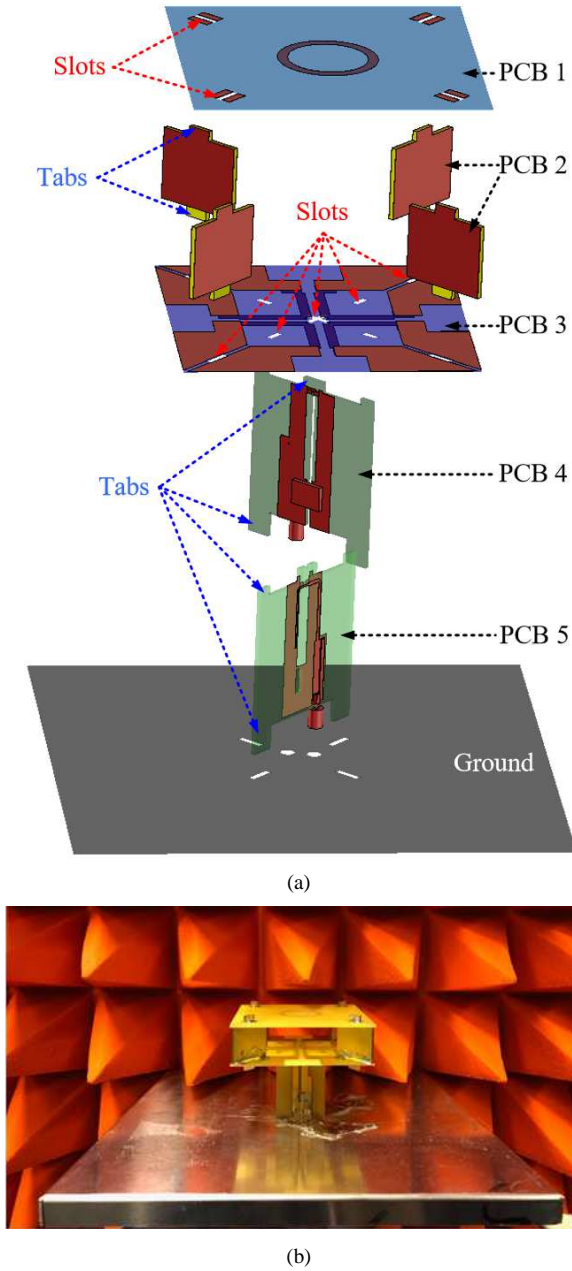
(a) Disassembled view of the antenna configuration. (b) Photo of the fabricated antenna prototype.
